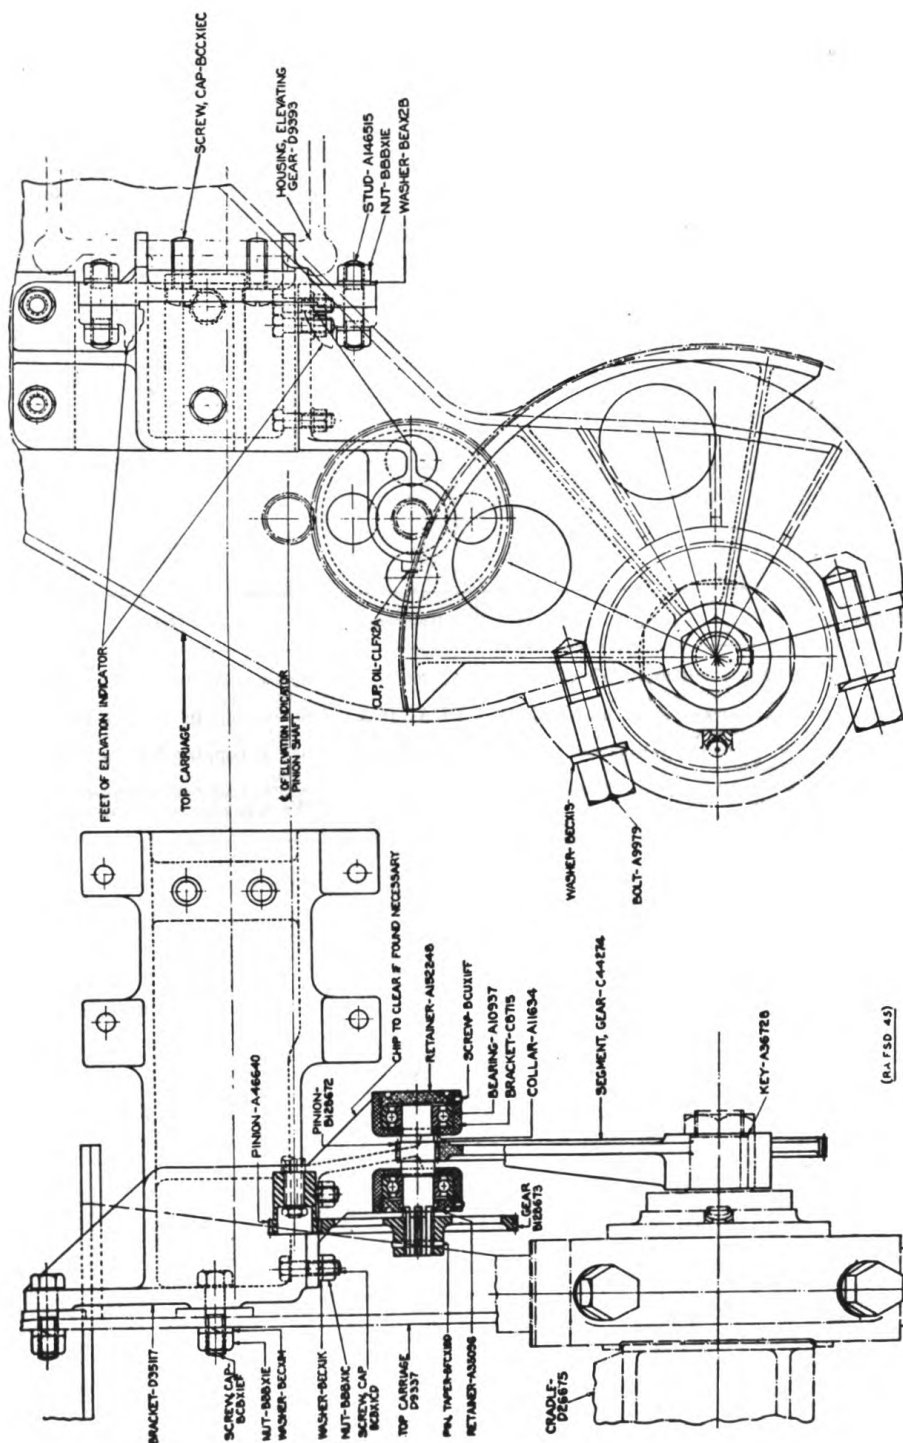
Elevation indicator drive and mounting, assembly—sectioned view.
